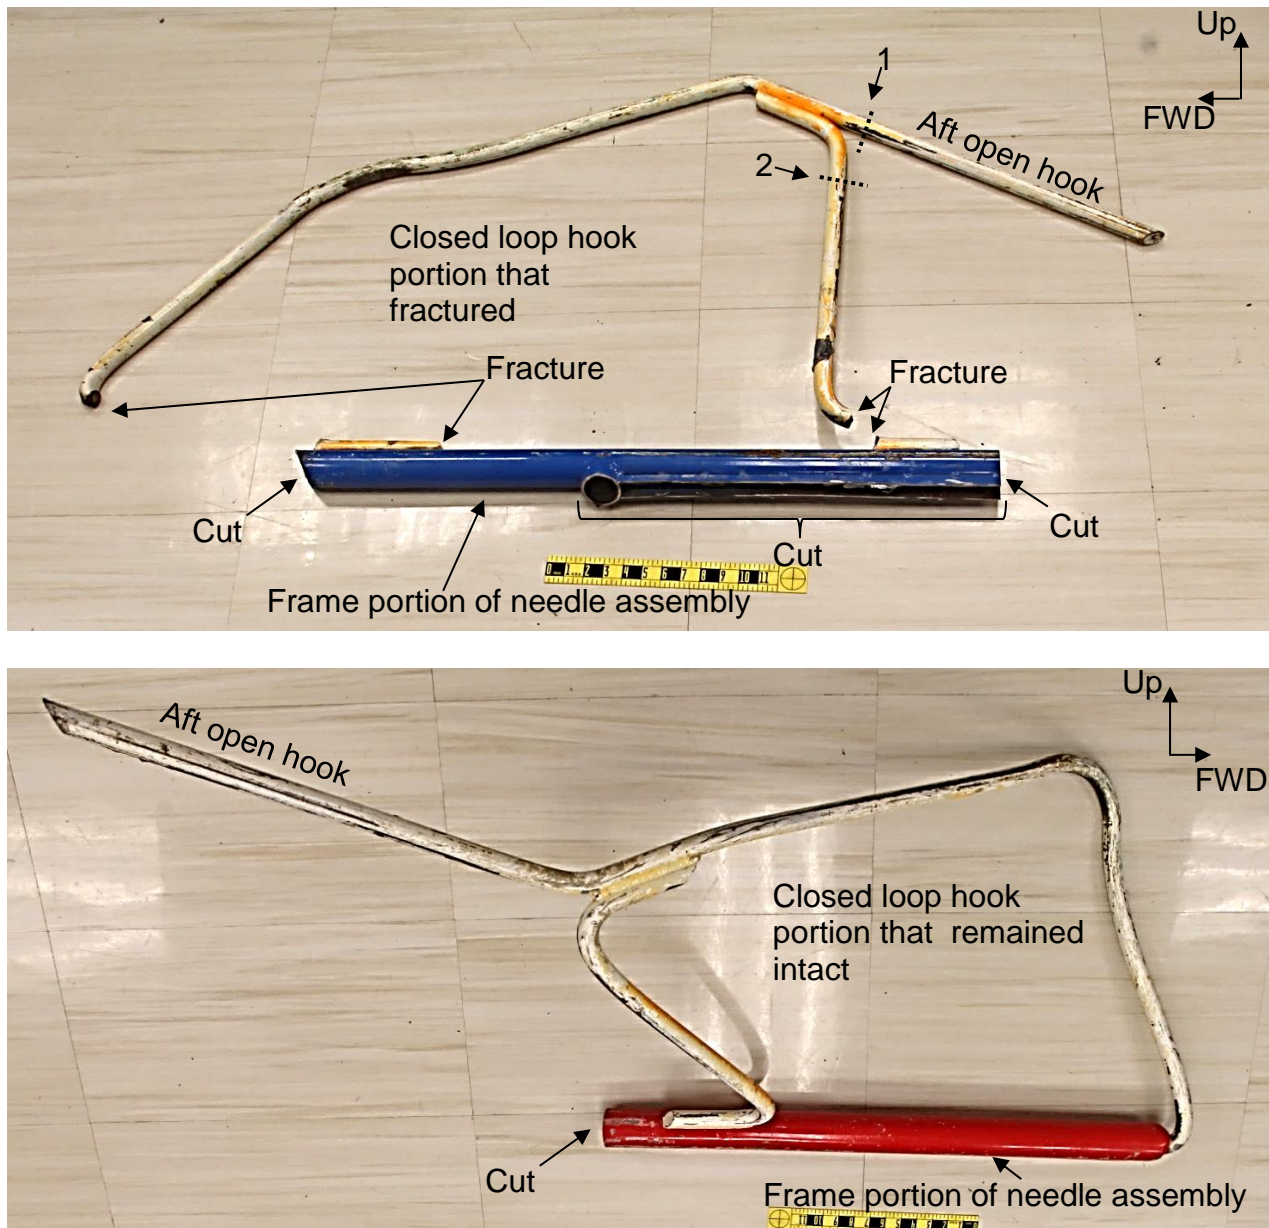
As-received portions of the fractured needle assembly showing the hooks at the center portion of the needle assembly (upper side of the page) and leading end portion of the needle assembly (lower side of page).
